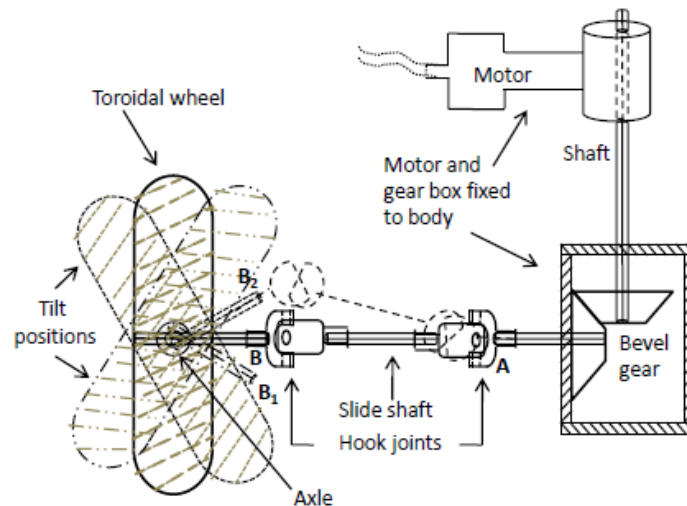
Bevel gears and Hook joints to transmit power to wheels
